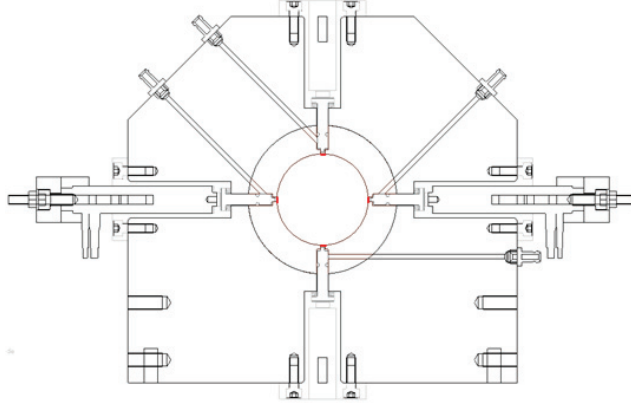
Gas journal bearing cross-section with hidden lines. The final assembly with two piezo actuators; red lines indicate location of the injection orifices.
